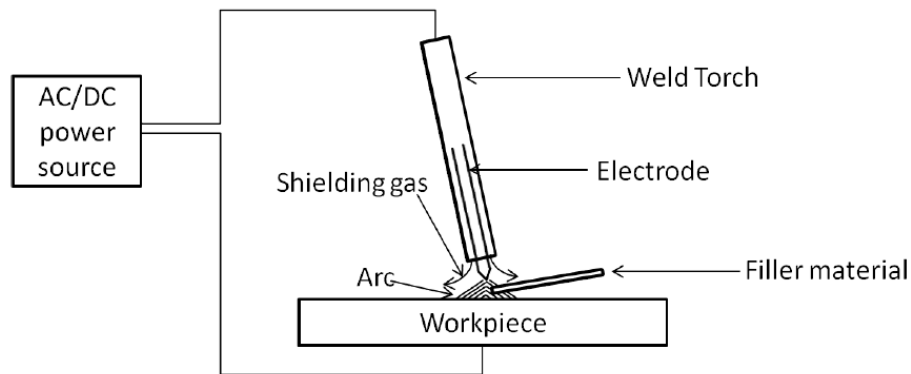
A TIG welding process (Larsson & Sagar, 2014, p. 5)
